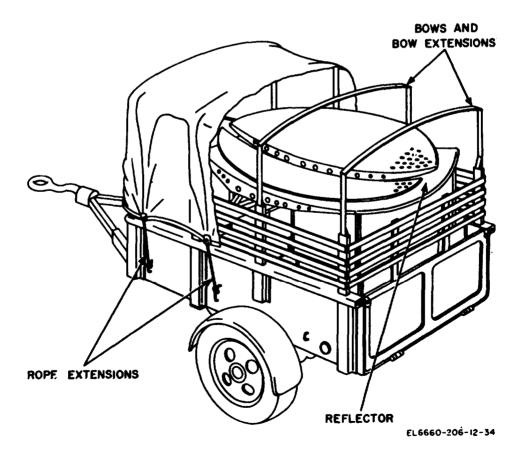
Trailer showing tarpaulin and bow extensions.
